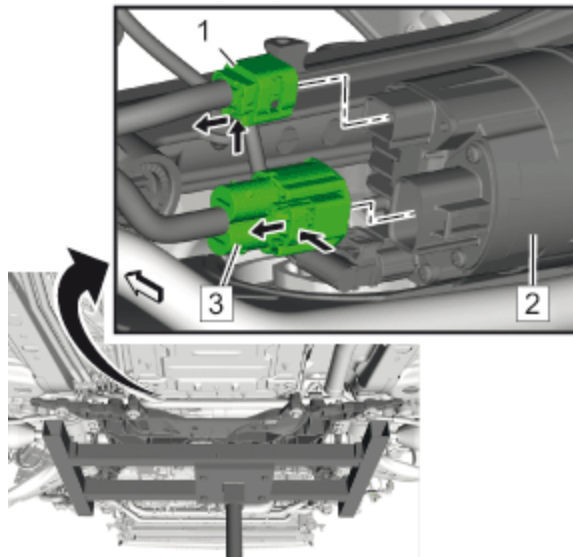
Power Steering Assist Motor And Electrical Connectors
